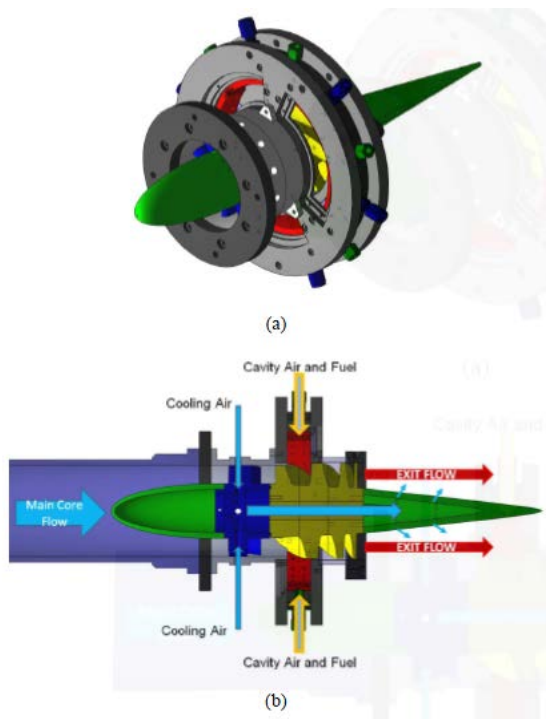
Full annular rig design assembly (a) and cross-section (b) [90]
